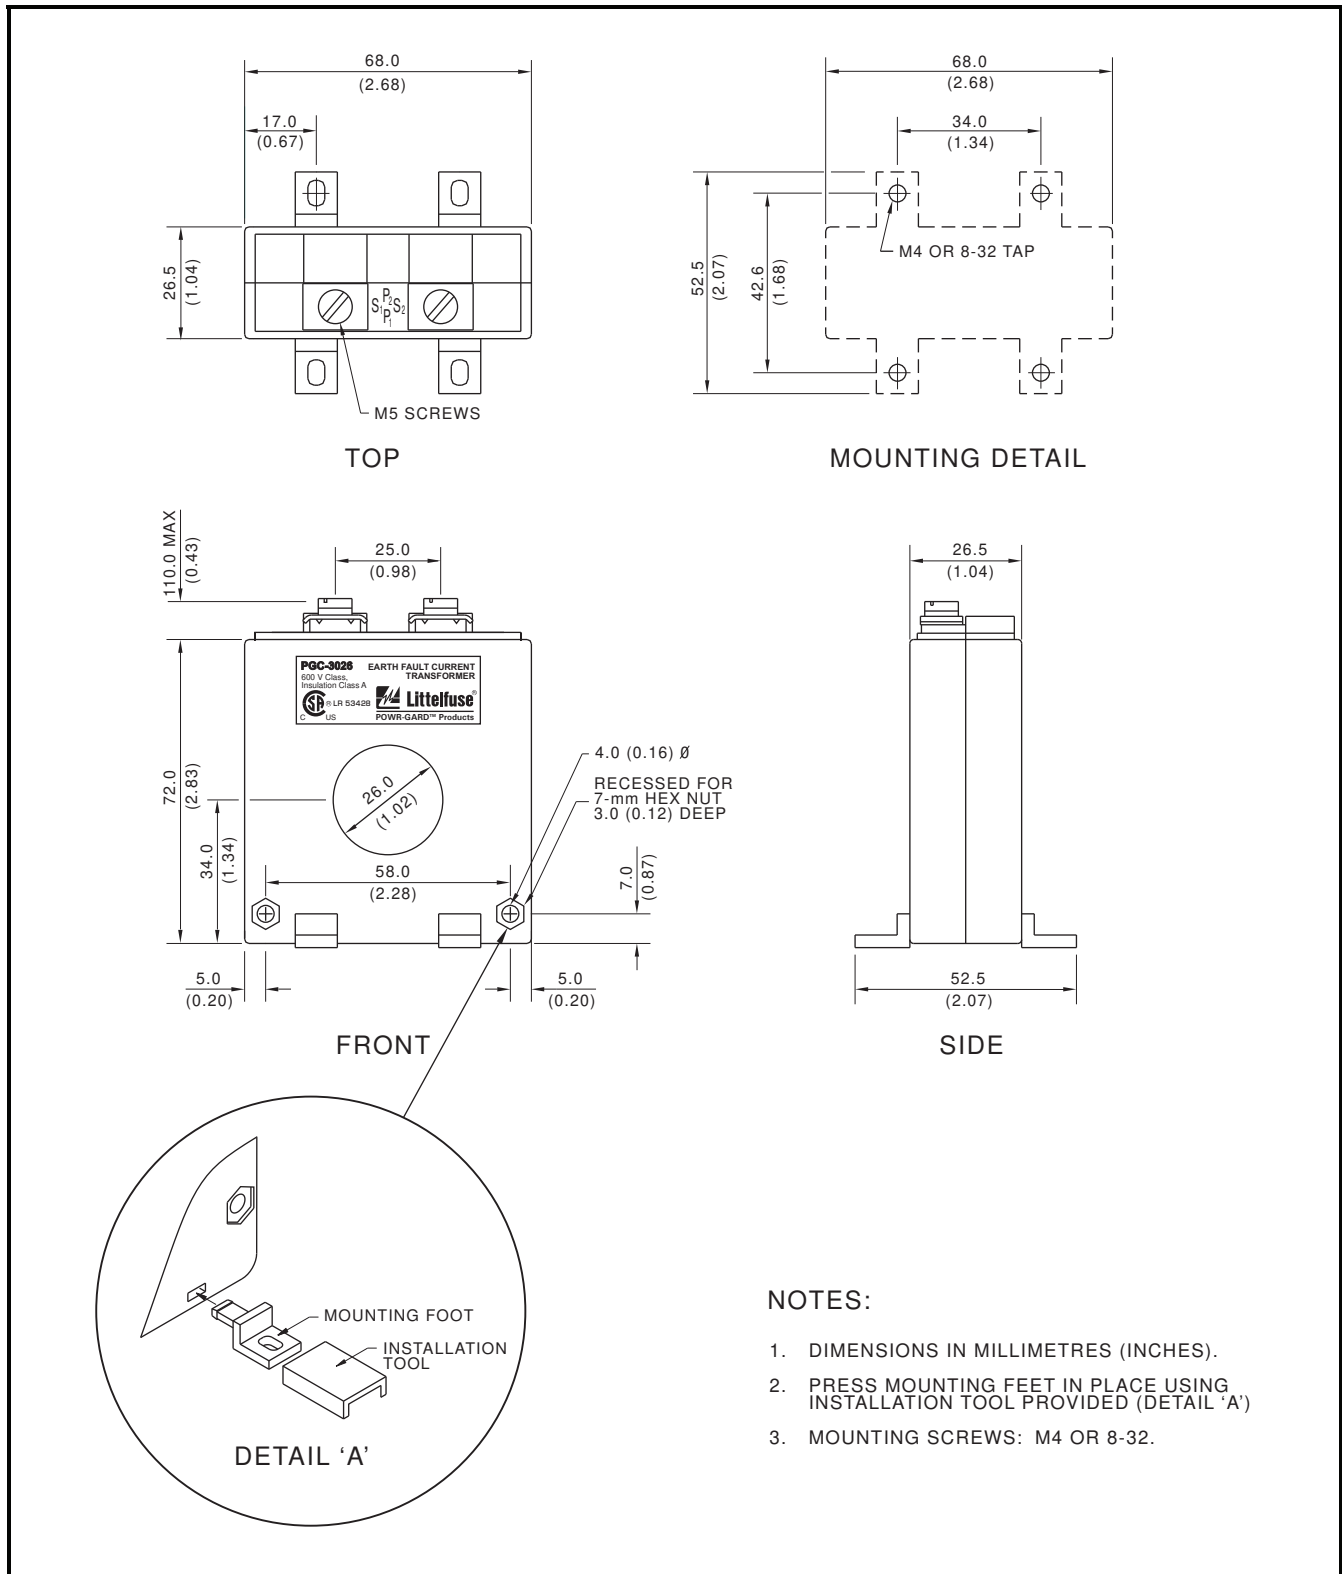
PGC-3026 Outline and Mounting Details.
